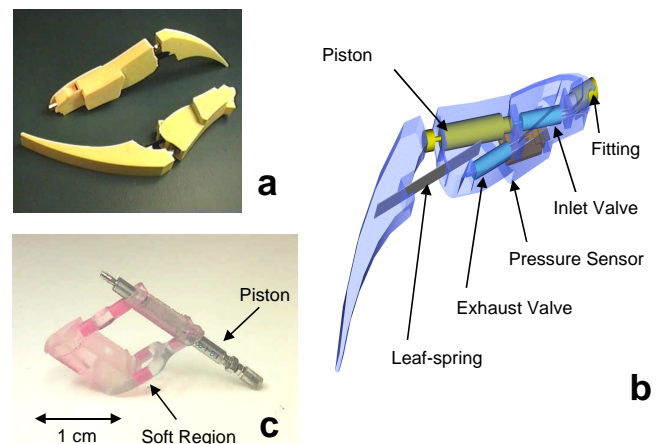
SDM mechanisms with embedded components and integrated hard and soft materials: (a) robot leg, (b) cut-away view of leg showing embedded components, (c) linkage with embedded piston and compliant flexures.
